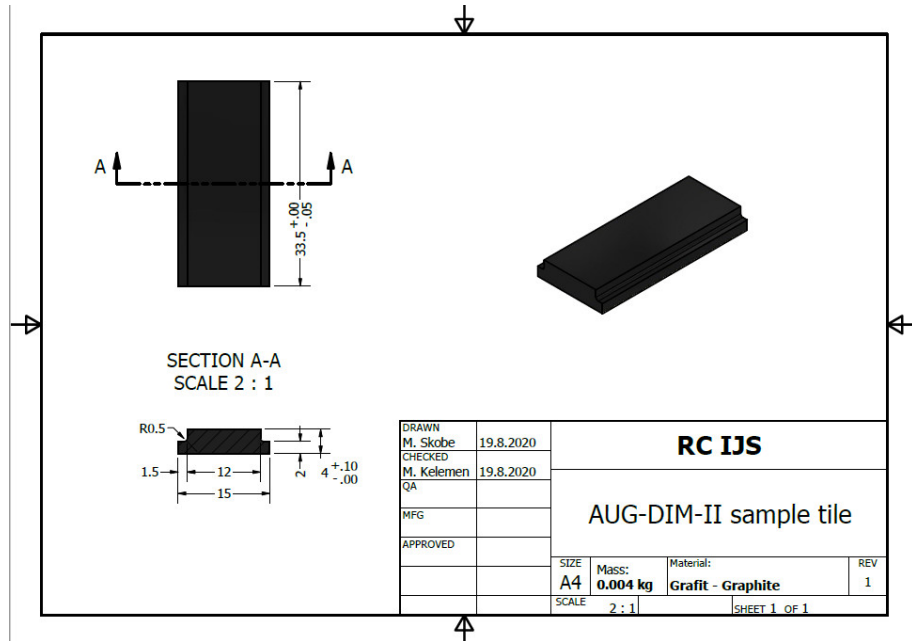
Technical drawing of graphite tile, to fit into the AUG-DIM-II manipulator. Drawing done by Matevž Skobe, JSI.
